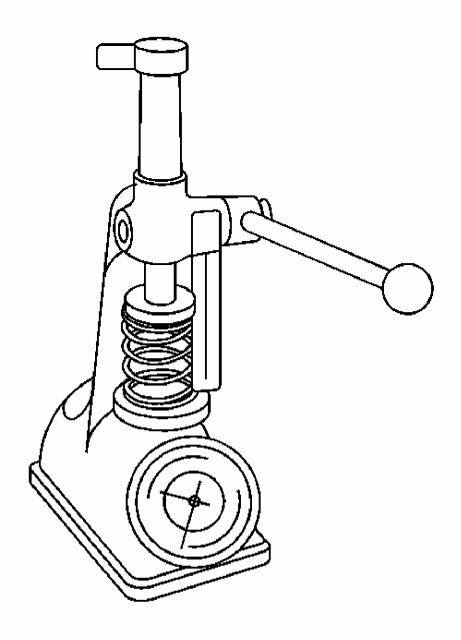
Inspecting Valve Spring Courtesy of GENERAL MOTORS CORP.
